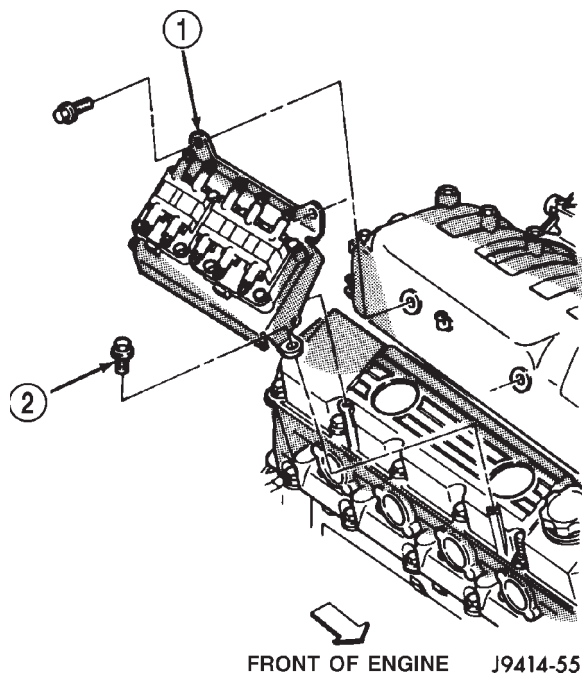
Spark Plug Wire Heat Shields (Left Side Shown)
